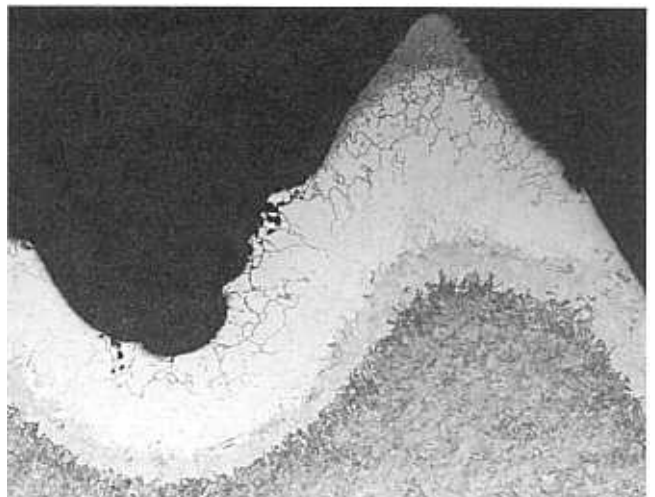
Reverted austenite layer layer on fastener (magnification 50X).
